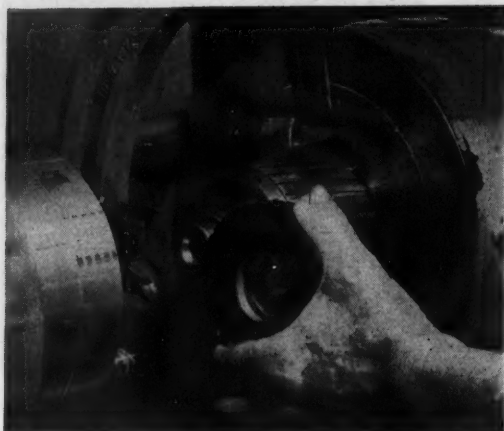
Broach Head and Cutter for Broaching Rifling in Tube for 90 MM Gun. Each Cutter Carries One Set of Teeth; Thus 34 Cutters are Required to Complete a Tube
